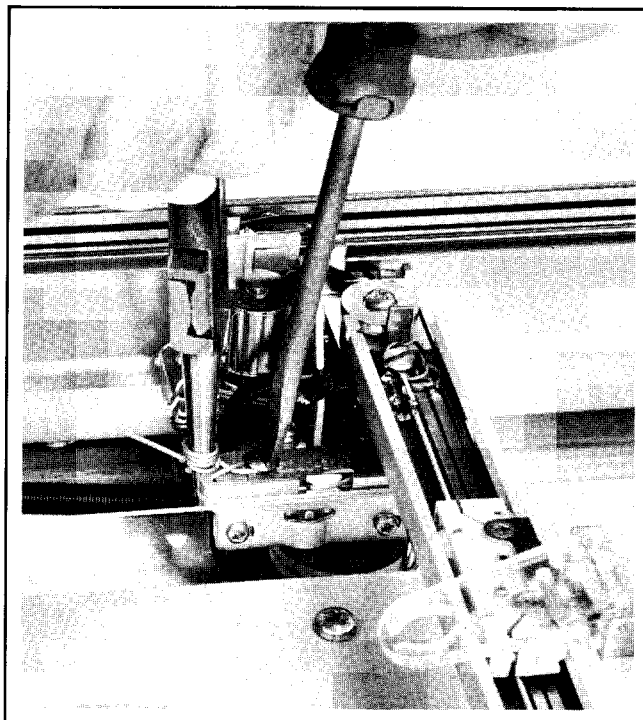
X-AXIS CABLE TIGHTENING
